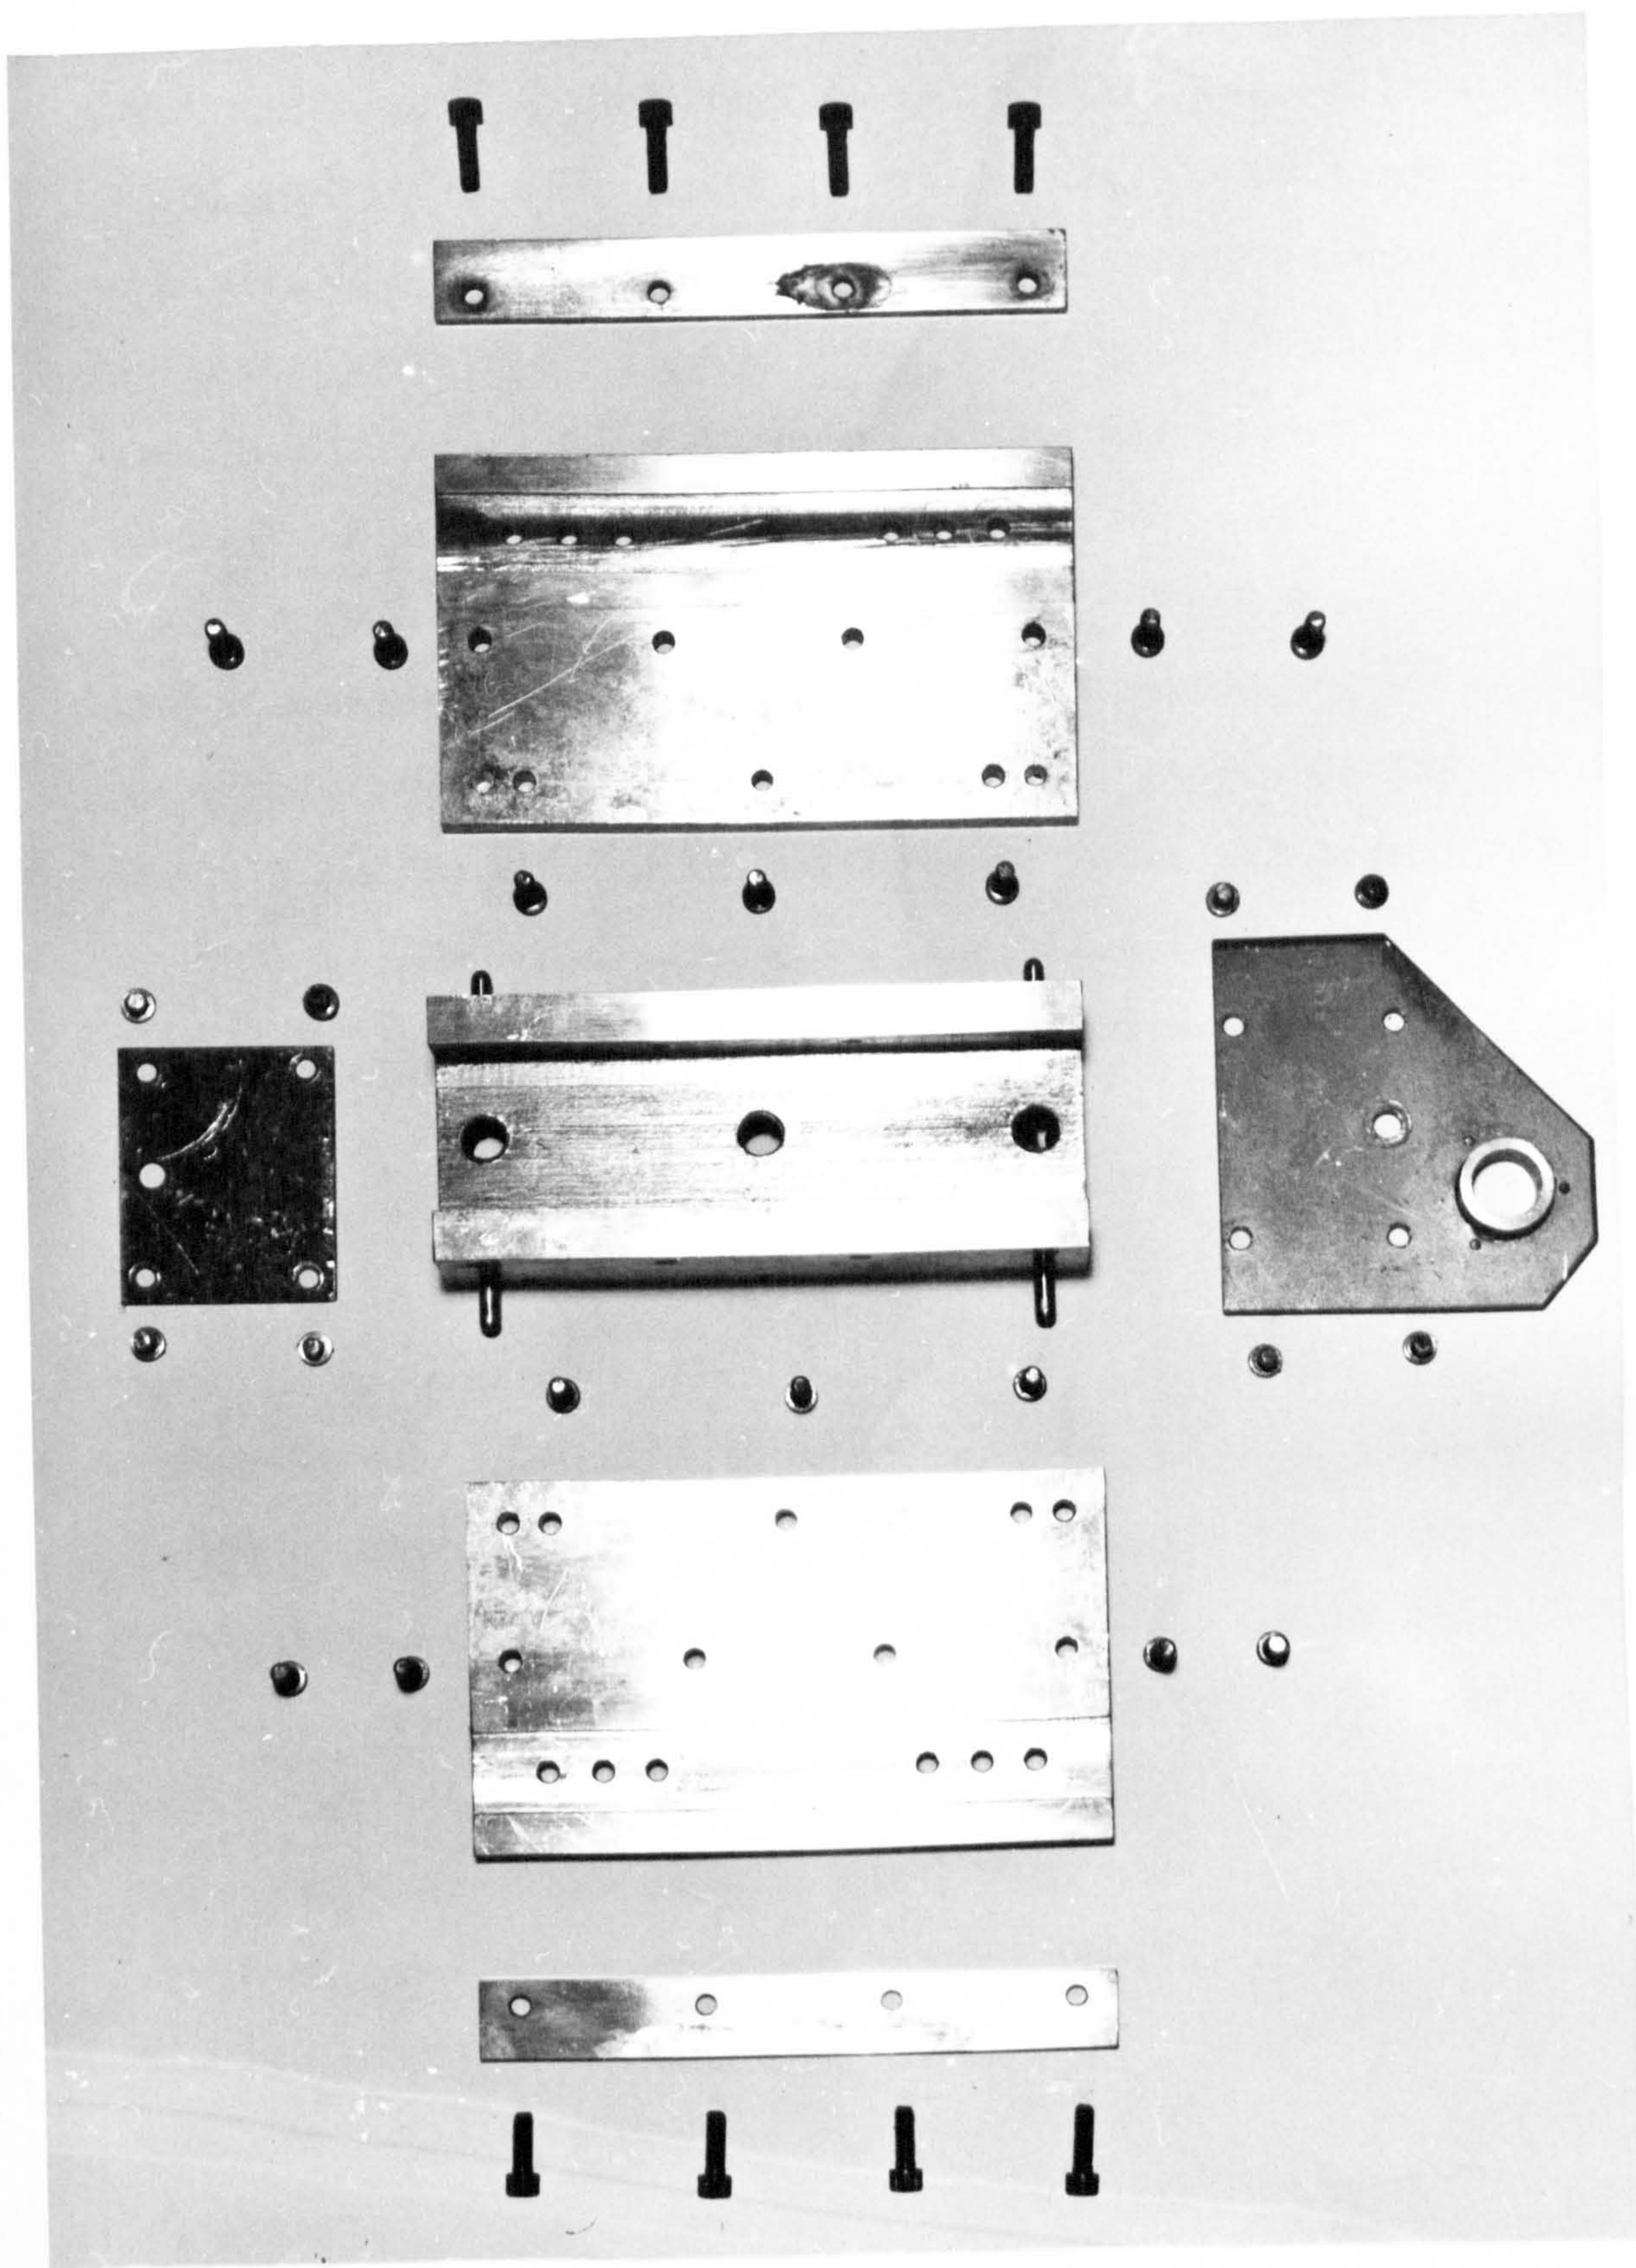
AN EXPLODED VIEW OF THE SLIDER GUIDE OF
